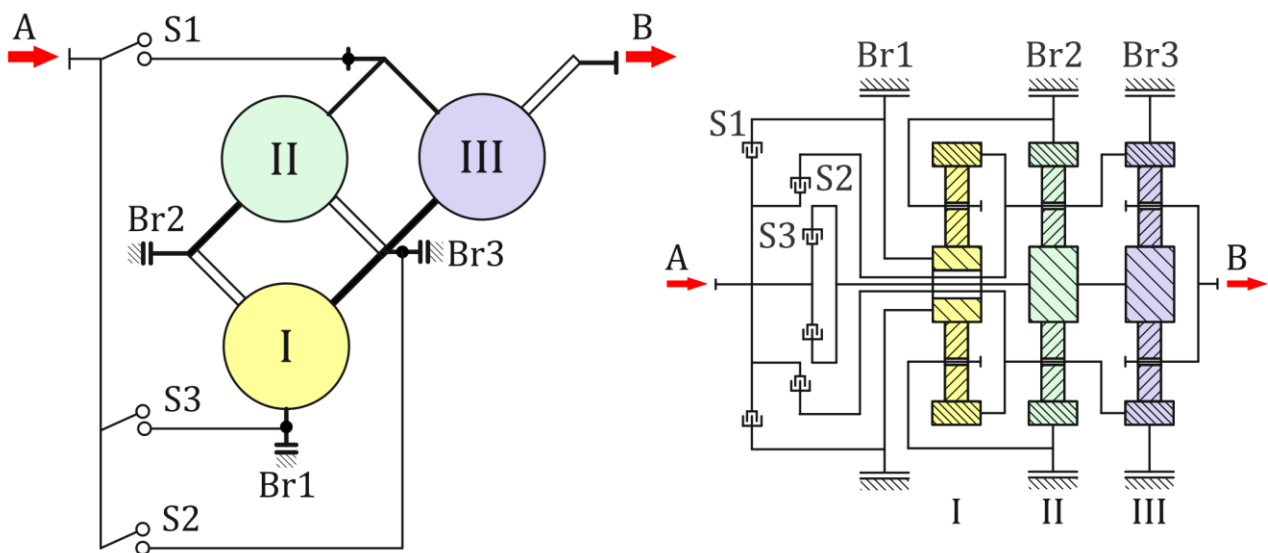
Structural (left) and kinematic scheme (right) of the three-carrier, six-speed ZF 6HP500 gearbox
